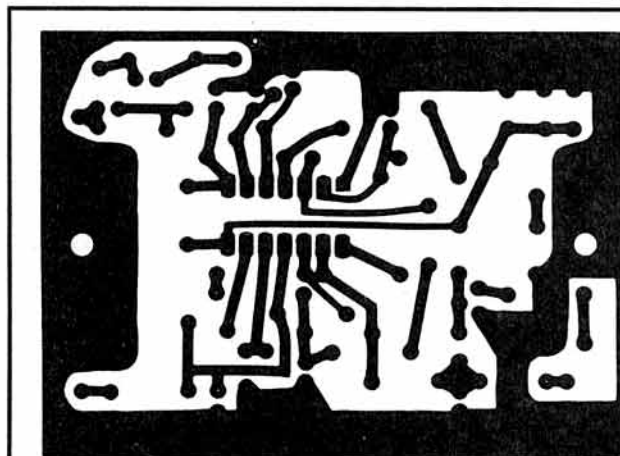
ALC PCB DESIGN - ACTUAL SIZE.
